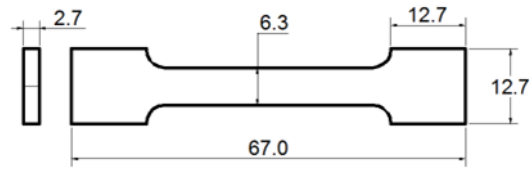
Injection mold part and geometry (Dimensions are in mm)
